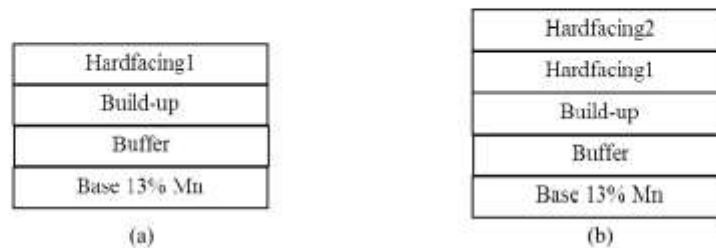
Schematic of welding layers deposition in the different atmospheric condition.
